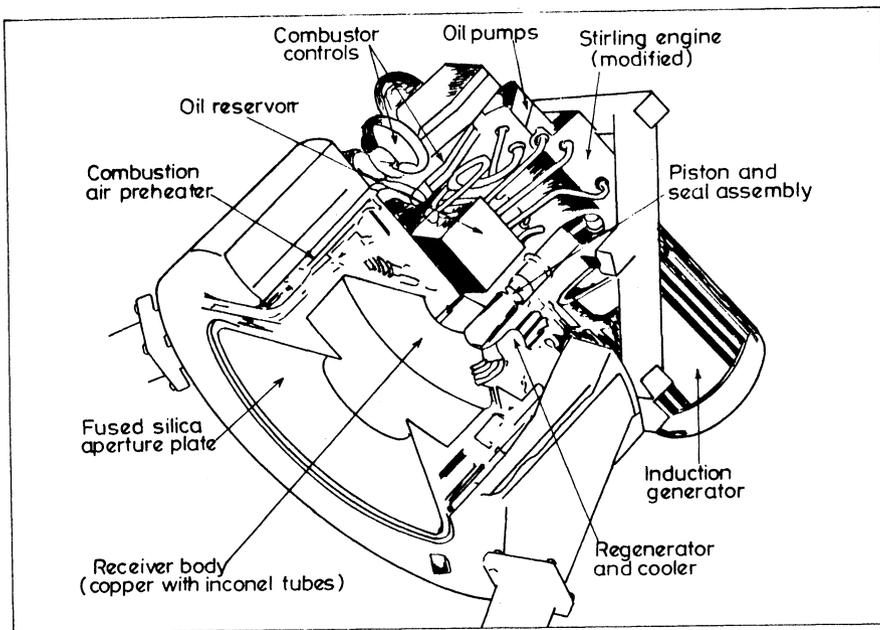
STIRLING ENGINE (P-40) WITH GENERATOR
